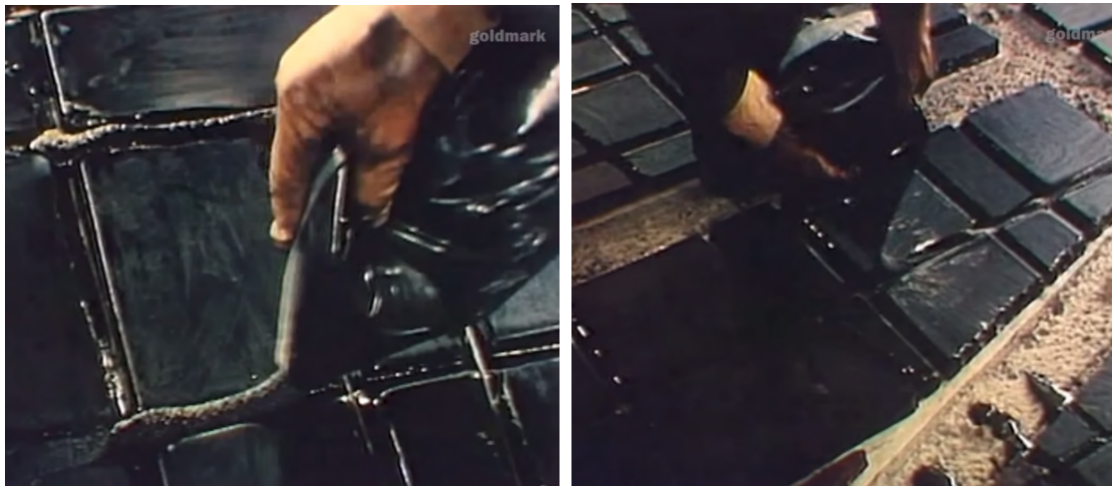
Construction of the cathedral, applying resin mix between the glass dalles [6].
